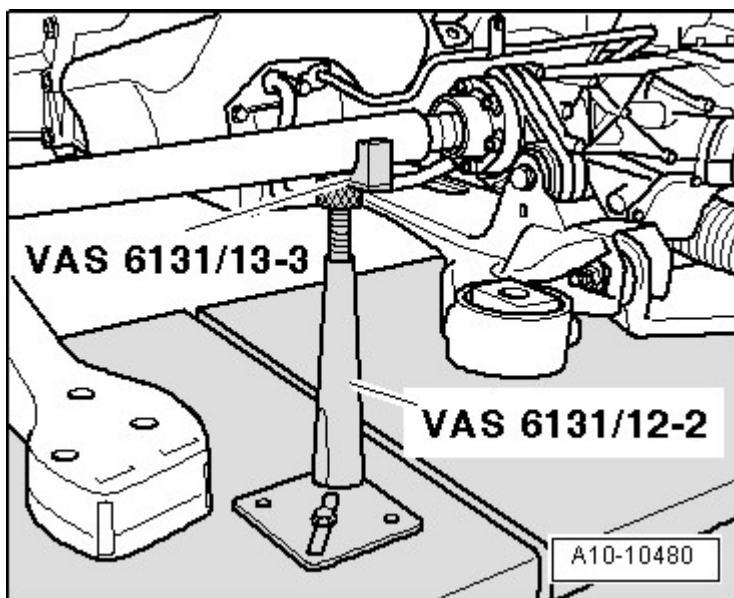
Identifying Support Elements VAS6131/12 And VAS6131/13 To Support Driveshaft
